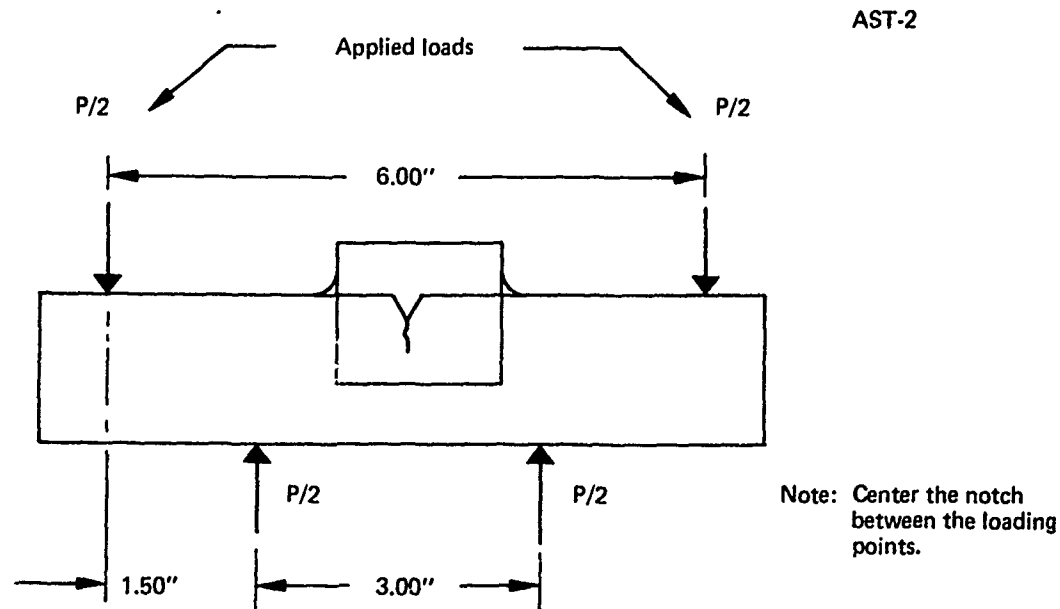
LOAD APPLICATION TO NOTCH BEND SPECIMEN
